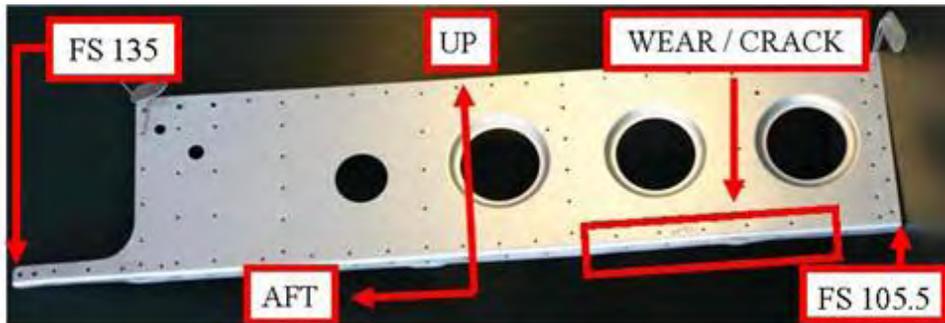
Macroscopic View of Crack 2 on the Left Front Spar Attachment FS 104.68
